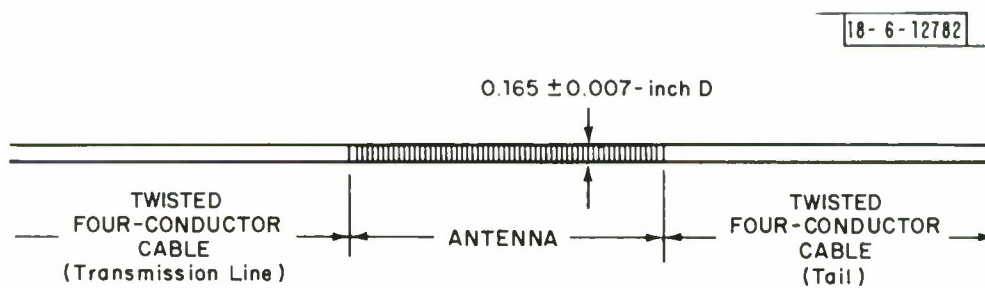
Core assembly diagram for buoyant cable jacket specification.
